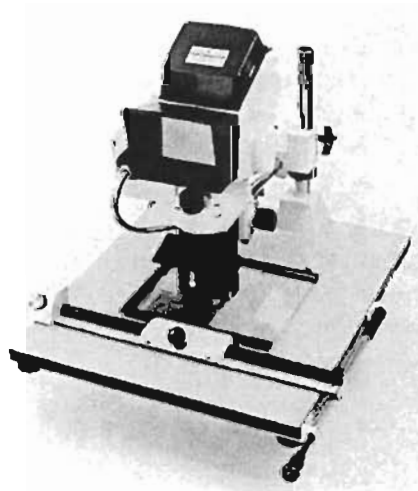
Visual inspection system, for close-up examination of electronics assemblies (Vision Engineering)
